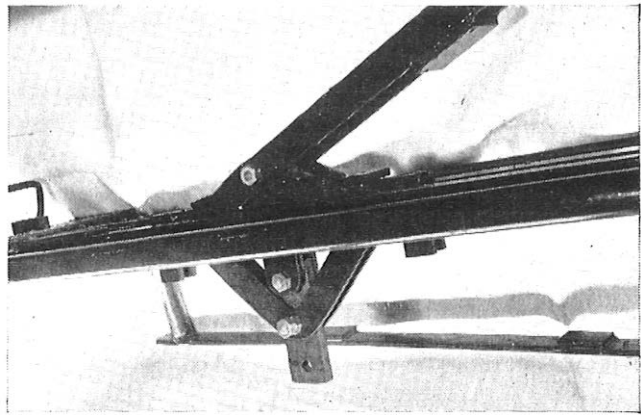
MECHANISM OF DUCT-RODDING MACHINE
